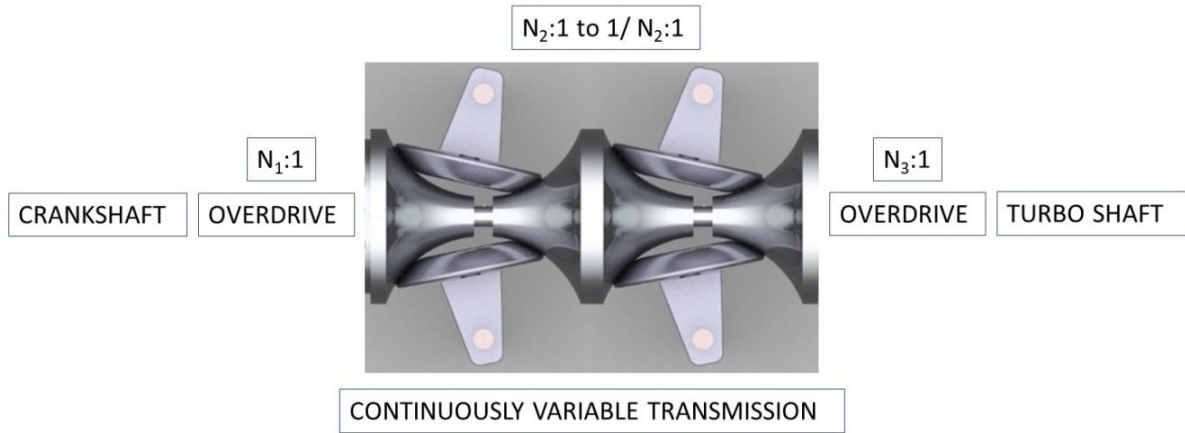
CVT based crankshaft to turboshaft connection. (reproduced and modified after Kamel [12])
